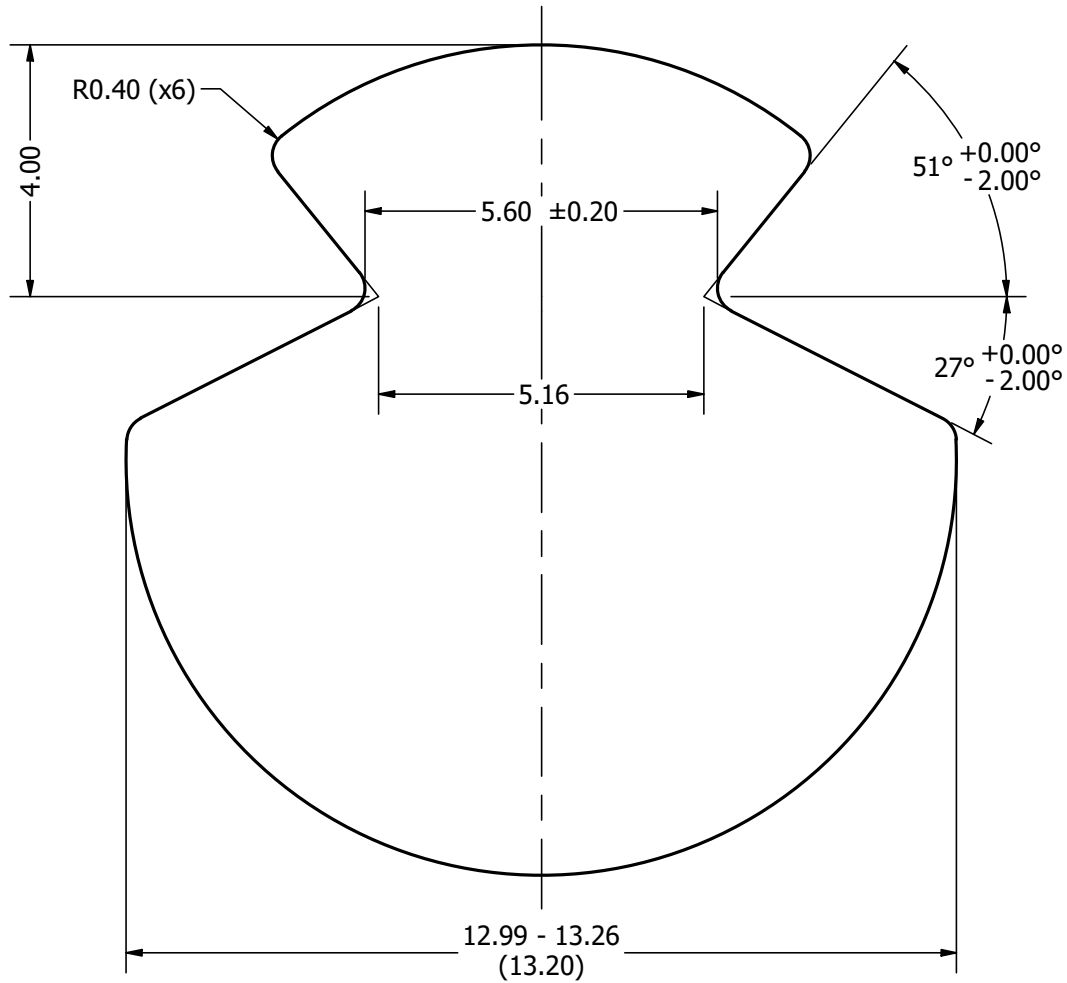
Contact Wire type AC-120 CuETP Drawing [32]
